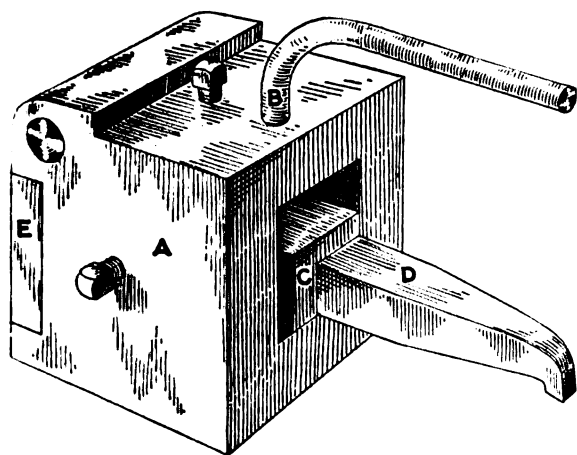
DETAILS OF HANDY ASSEMBLING STAND FOR AUTOMOBILE MOTORS
